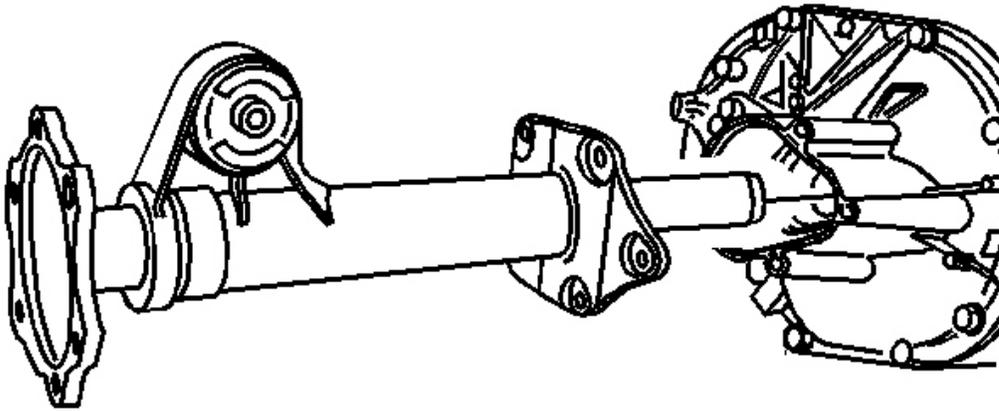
Inner Axle Housing & Inner Axle Shaft
